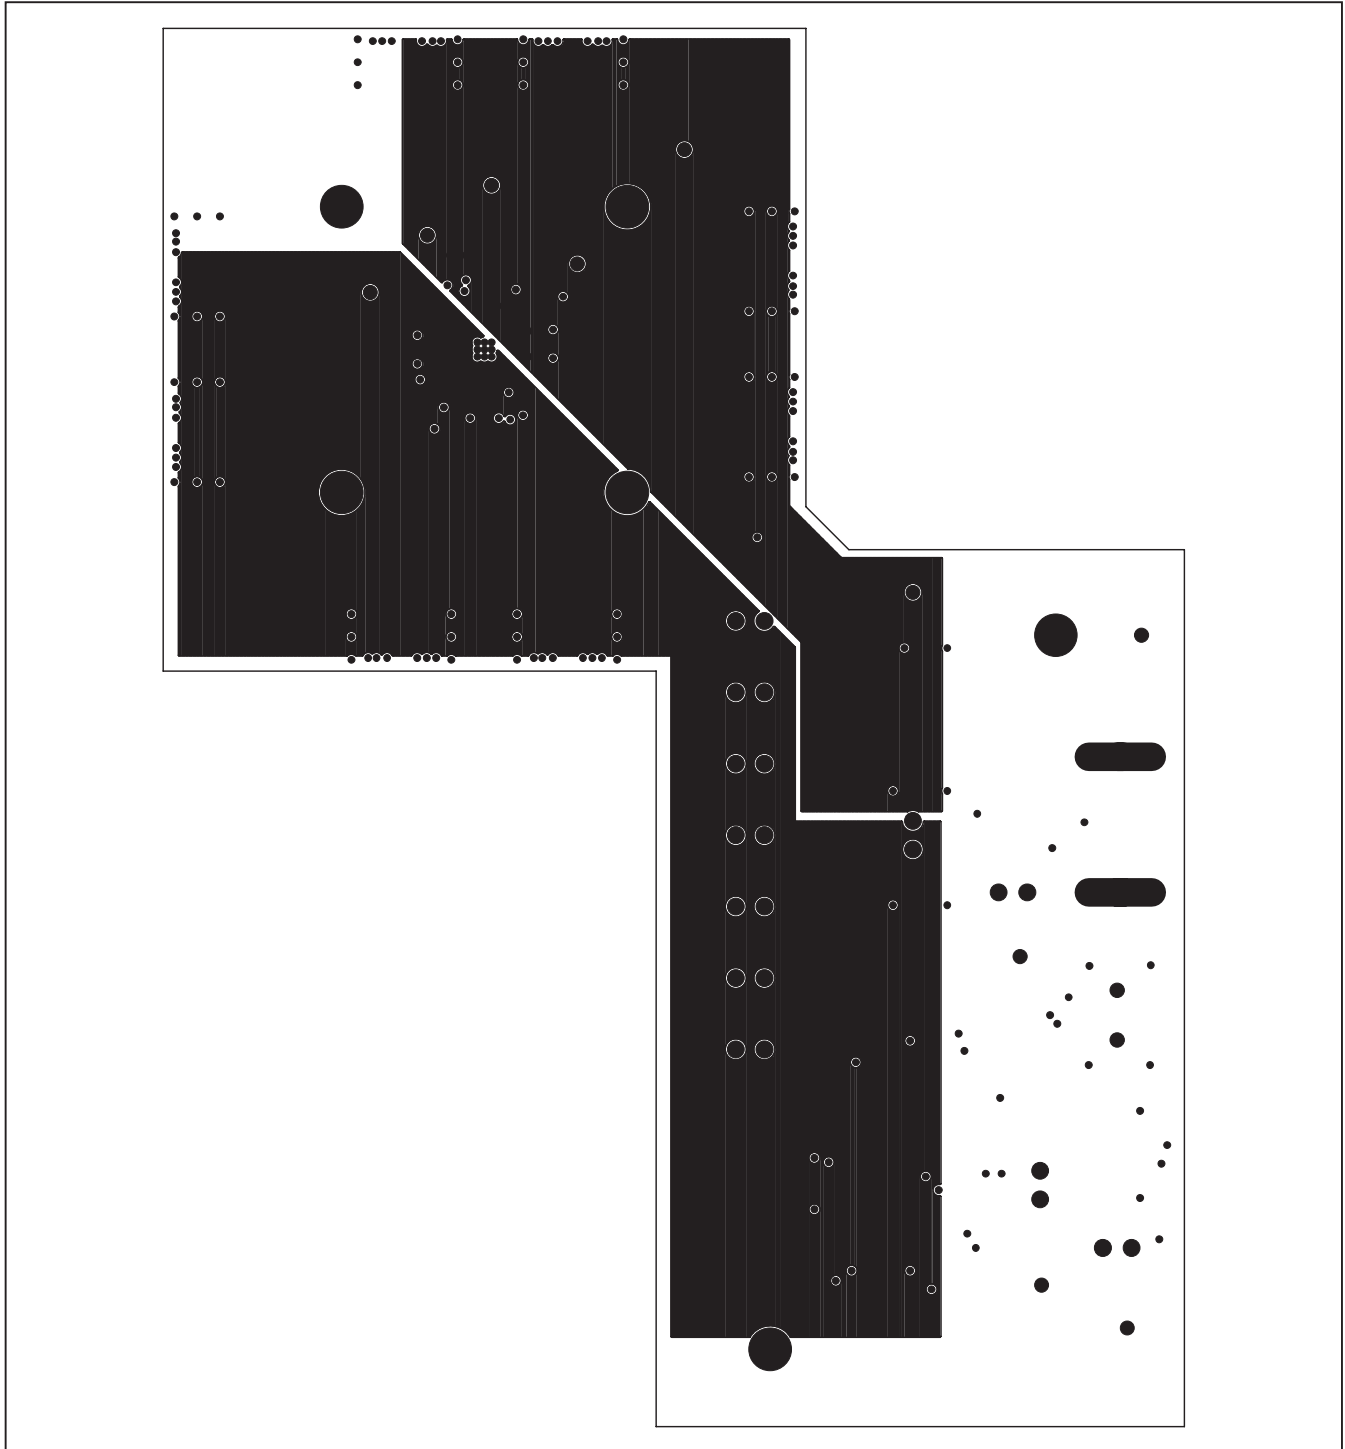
MAX3798 EV Kit PCB Layout—Power Plane
